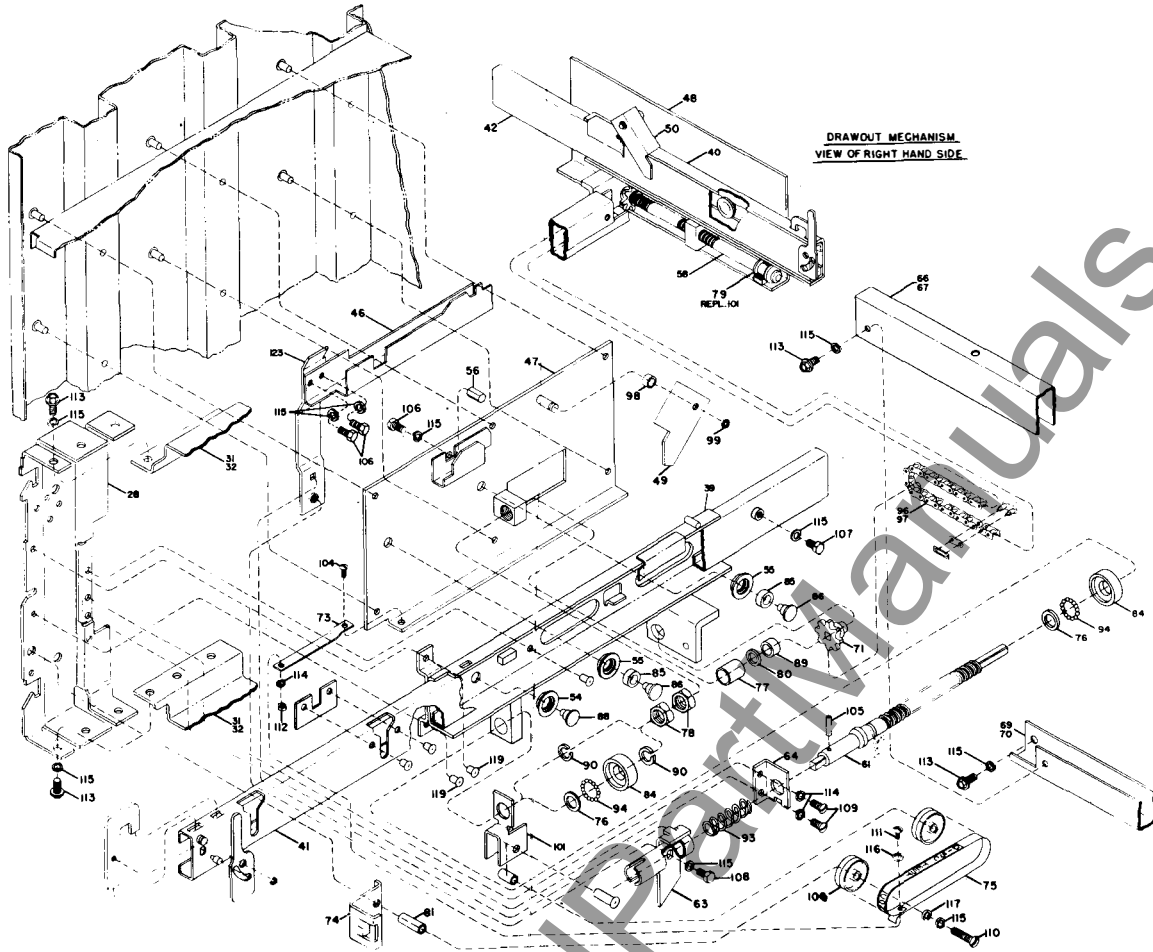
(0625E0376) Rackout mechanism for AK breakers
